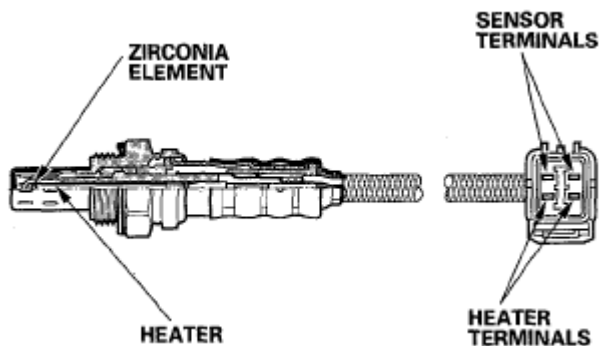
Identifying Secondary Heated Oxygen Sensor Parts Location
